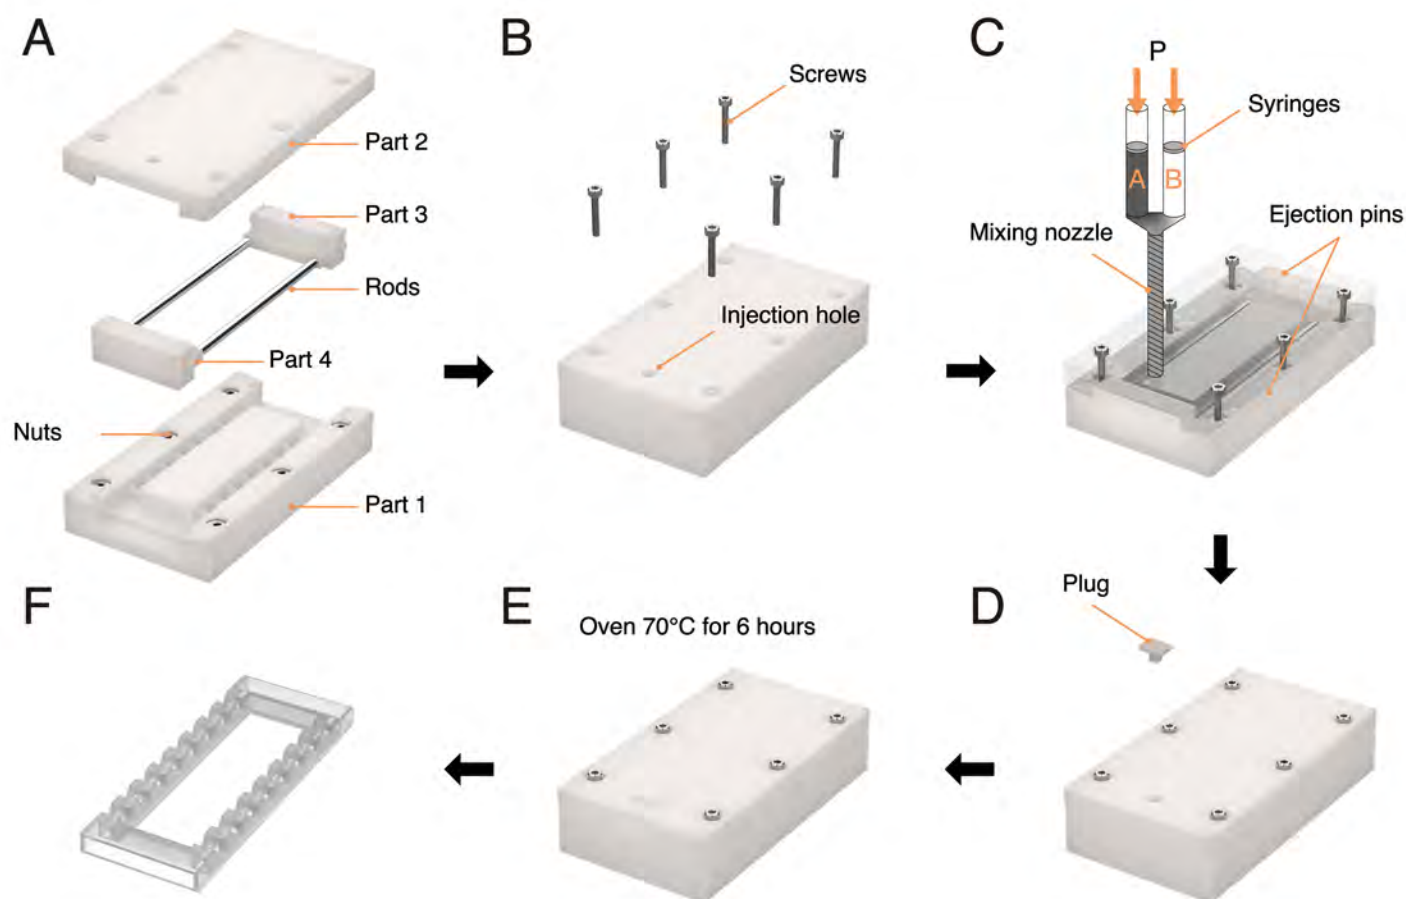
Frame fabrication process. (A) Four parts of the mold. (B) Screwing the assembled mold for alignment. (C) Injection molding. (D) Inserting the plug into the injection hole. (E) Oven curing. (F) Finishing fabrication of the frame.
